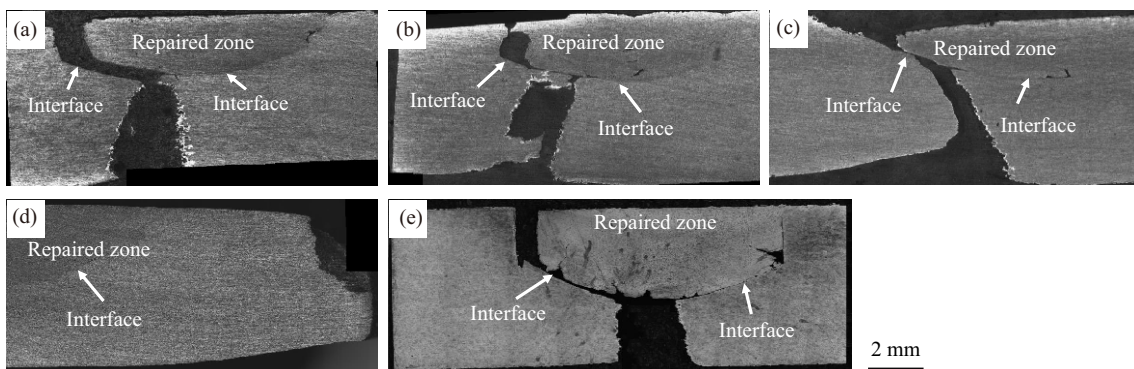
Lateral fracture features of tensile specimens at different tool rotation speeds: (a) S400, (b) S600, (c) S800, (d) S1000, and (e) S1000-Np.
